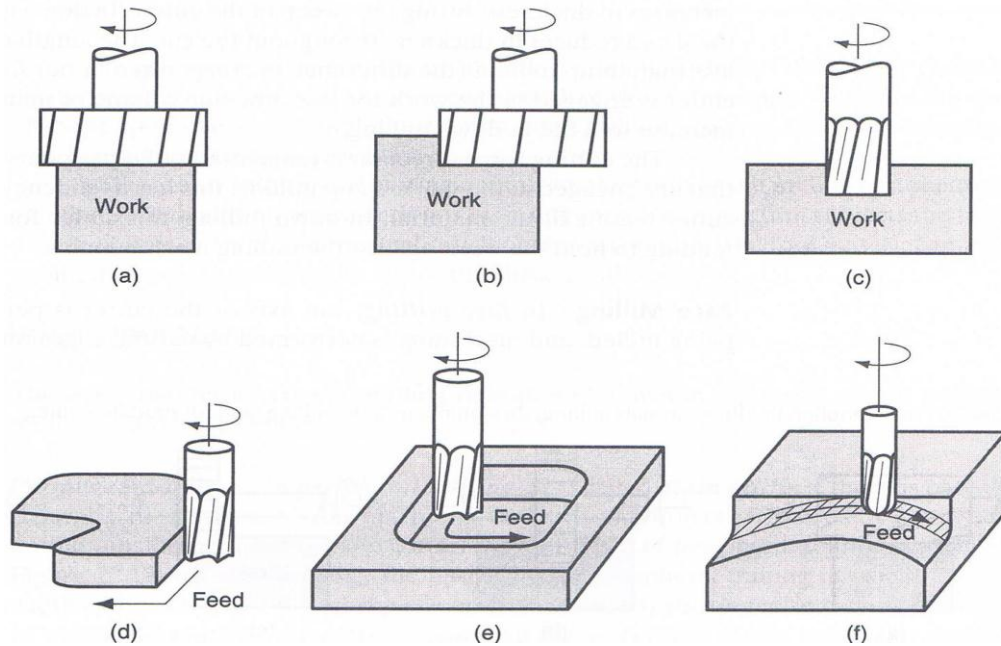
Face milling (a) Conventional face milling (b) Partial face milling (c) End milling (d) Profile milling (e) Pocket milling (f) Surface contouring
